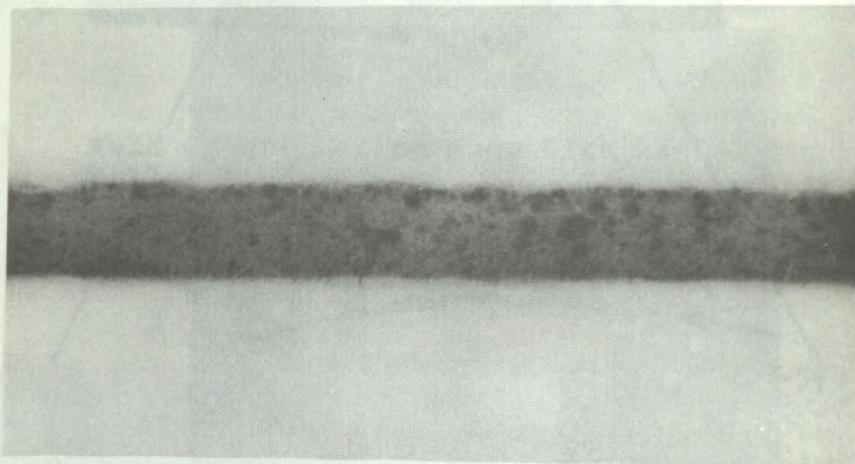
Positive X-ray Print Showing Porosity and Cracking in Weld Made on High Lead Base Plate Using 2X Filler Wire.
